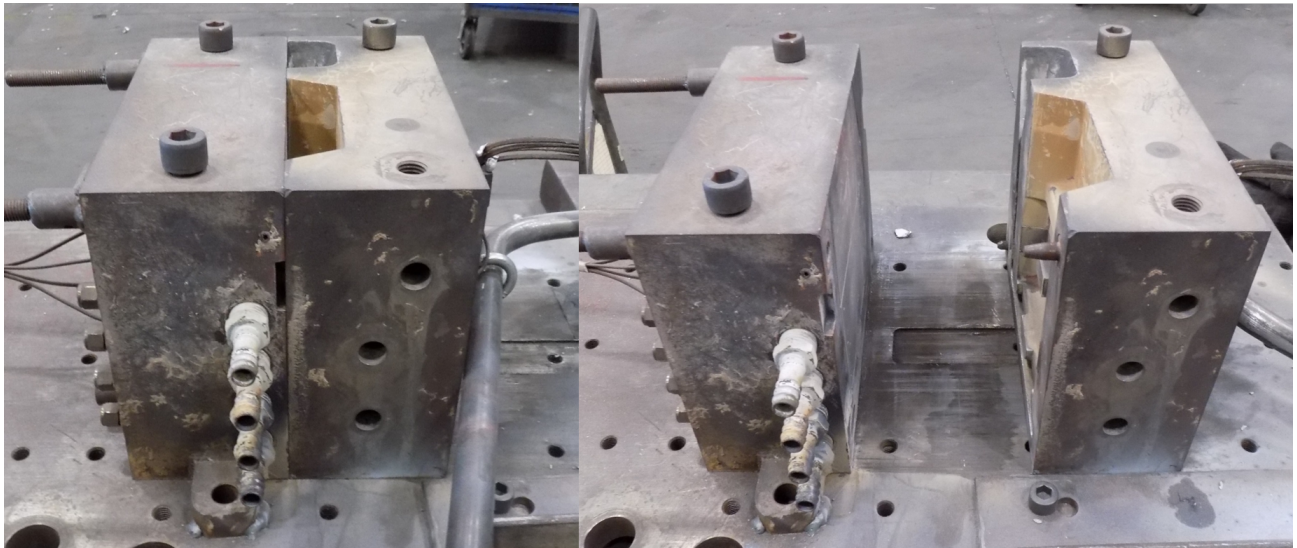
Linamar Mold: (Left) Mold in Closed Position (Right) Mold in Open Position.
